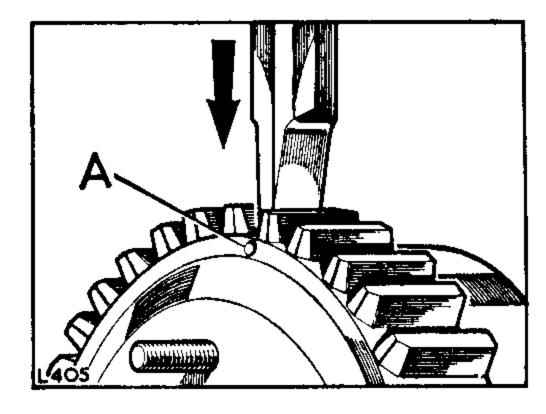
Removing an unserviceable starter ring A-Drilled hole
